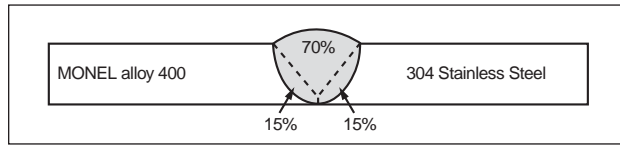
Weld metal contributed by each source in a dissimilar weld.
